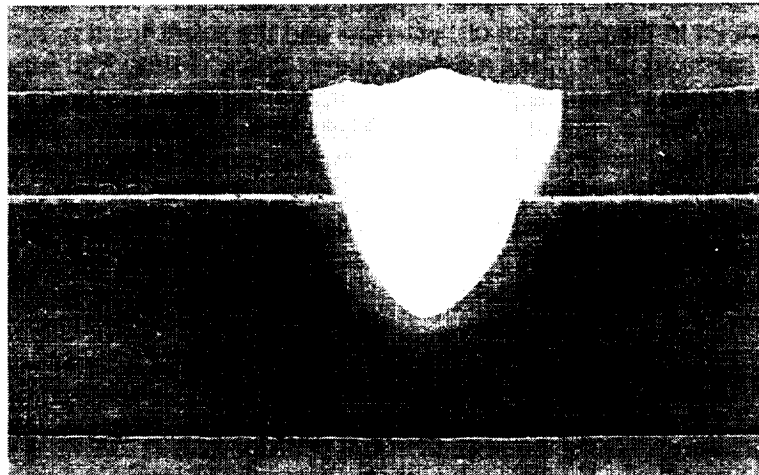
Photographic Copies of Radiographs of Welds Produced During the Experiment to Confirm Welding Process Parameters.
